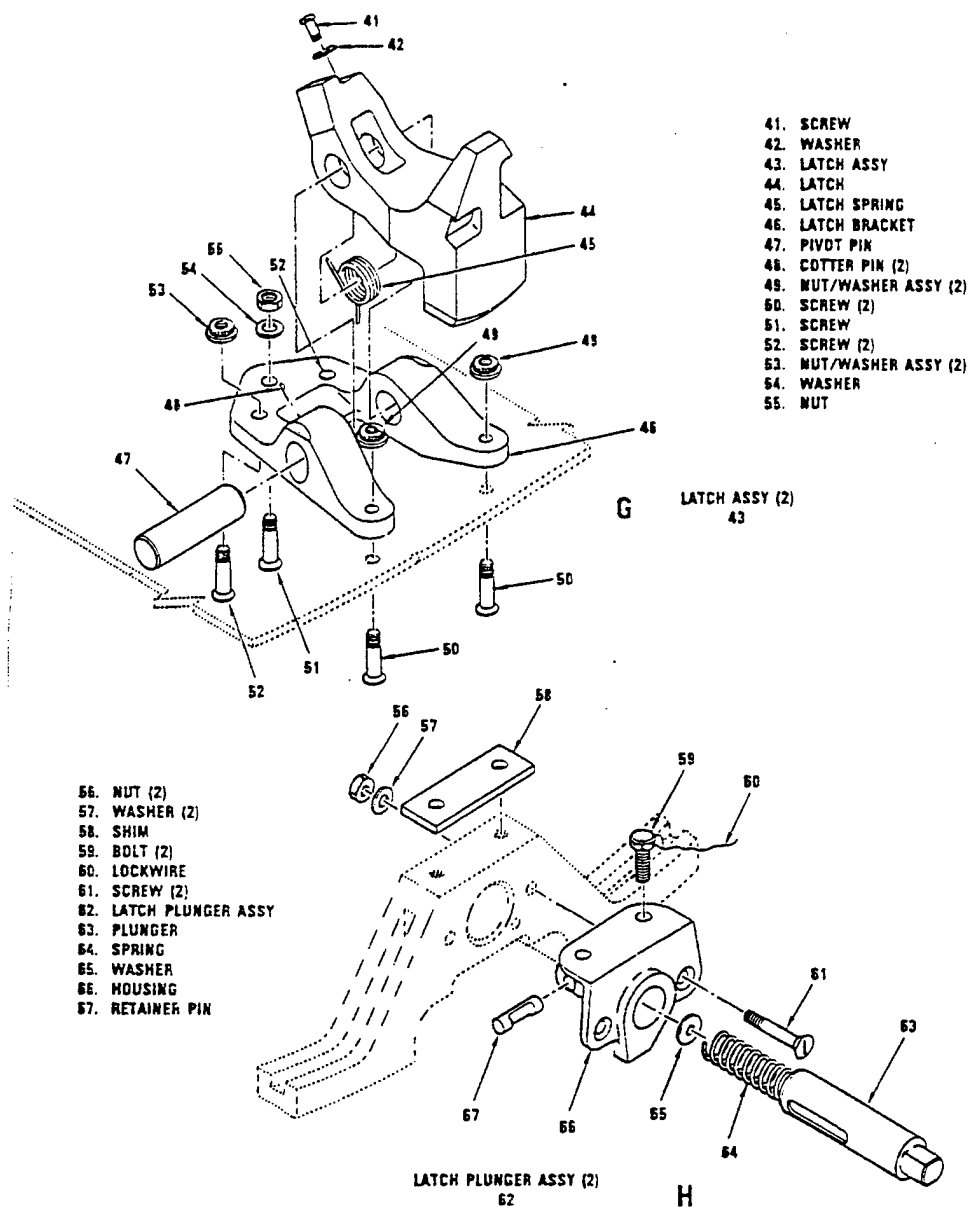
TOMAHAWK Capsule Illustrated Parts Breakdown (Sheet 4 of 6)
